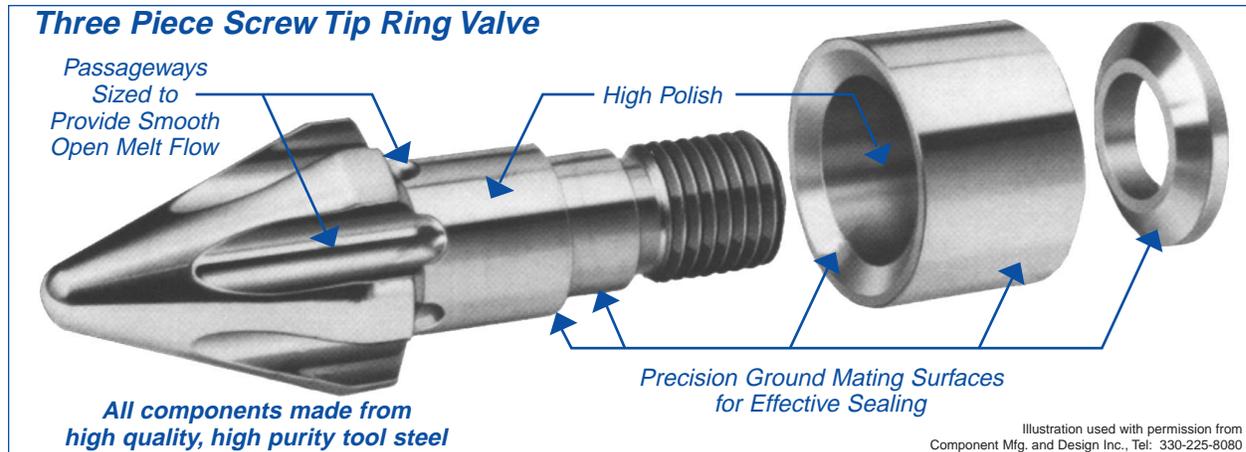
Disassembled view of a three piece screw tip ring valve assembly showing its component parts
